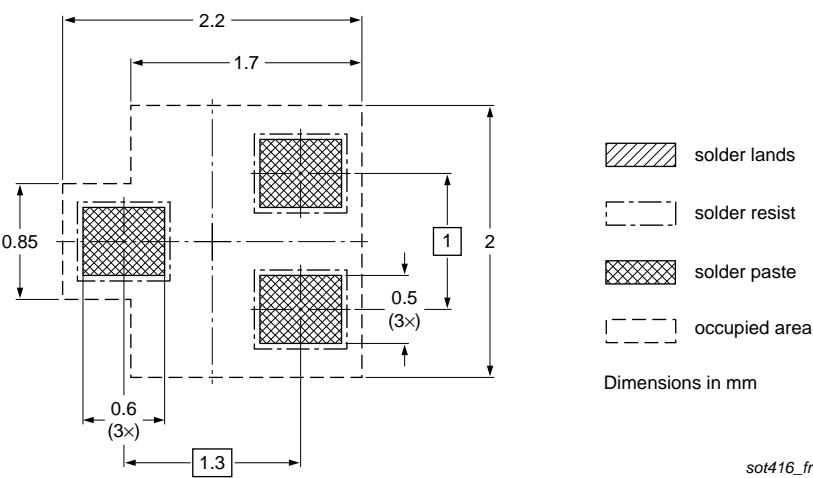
Reflow soldering footprint for SOT416 (SC-75)
